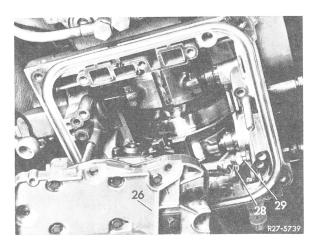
26 Shift valve housing 28 Range selector valve 29 Detent plate
